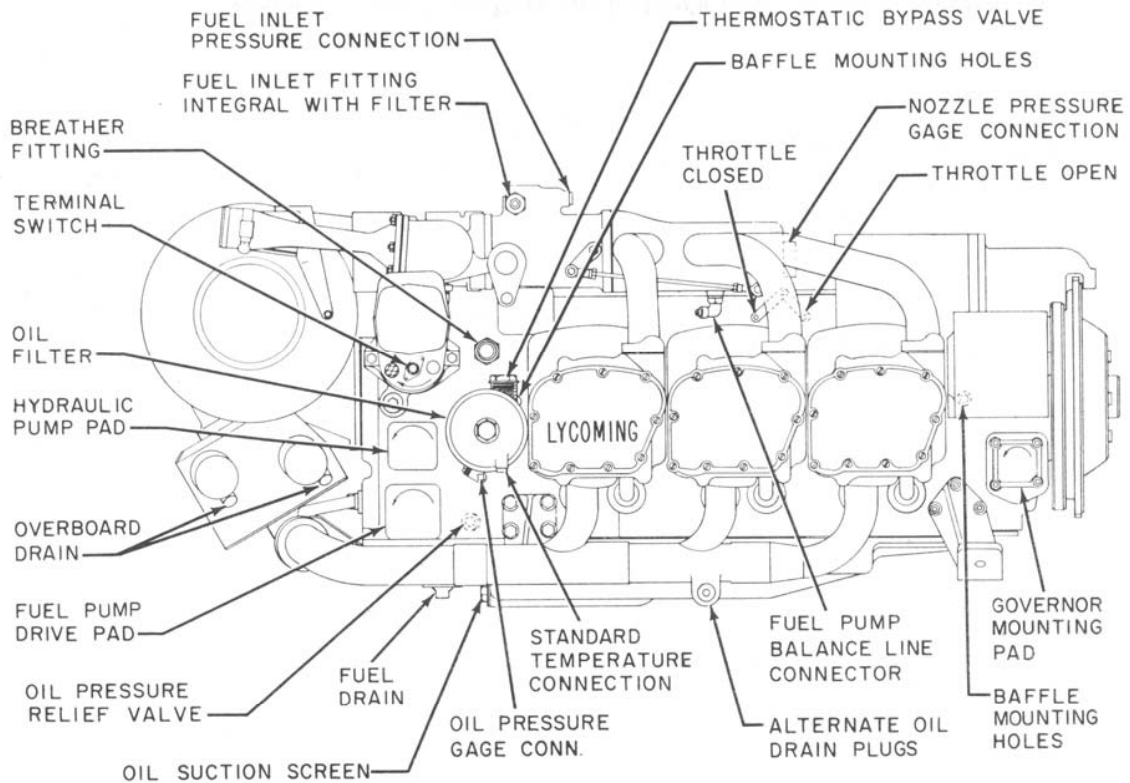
Installation Drawing – Right Side View – TIO-541-A Series
